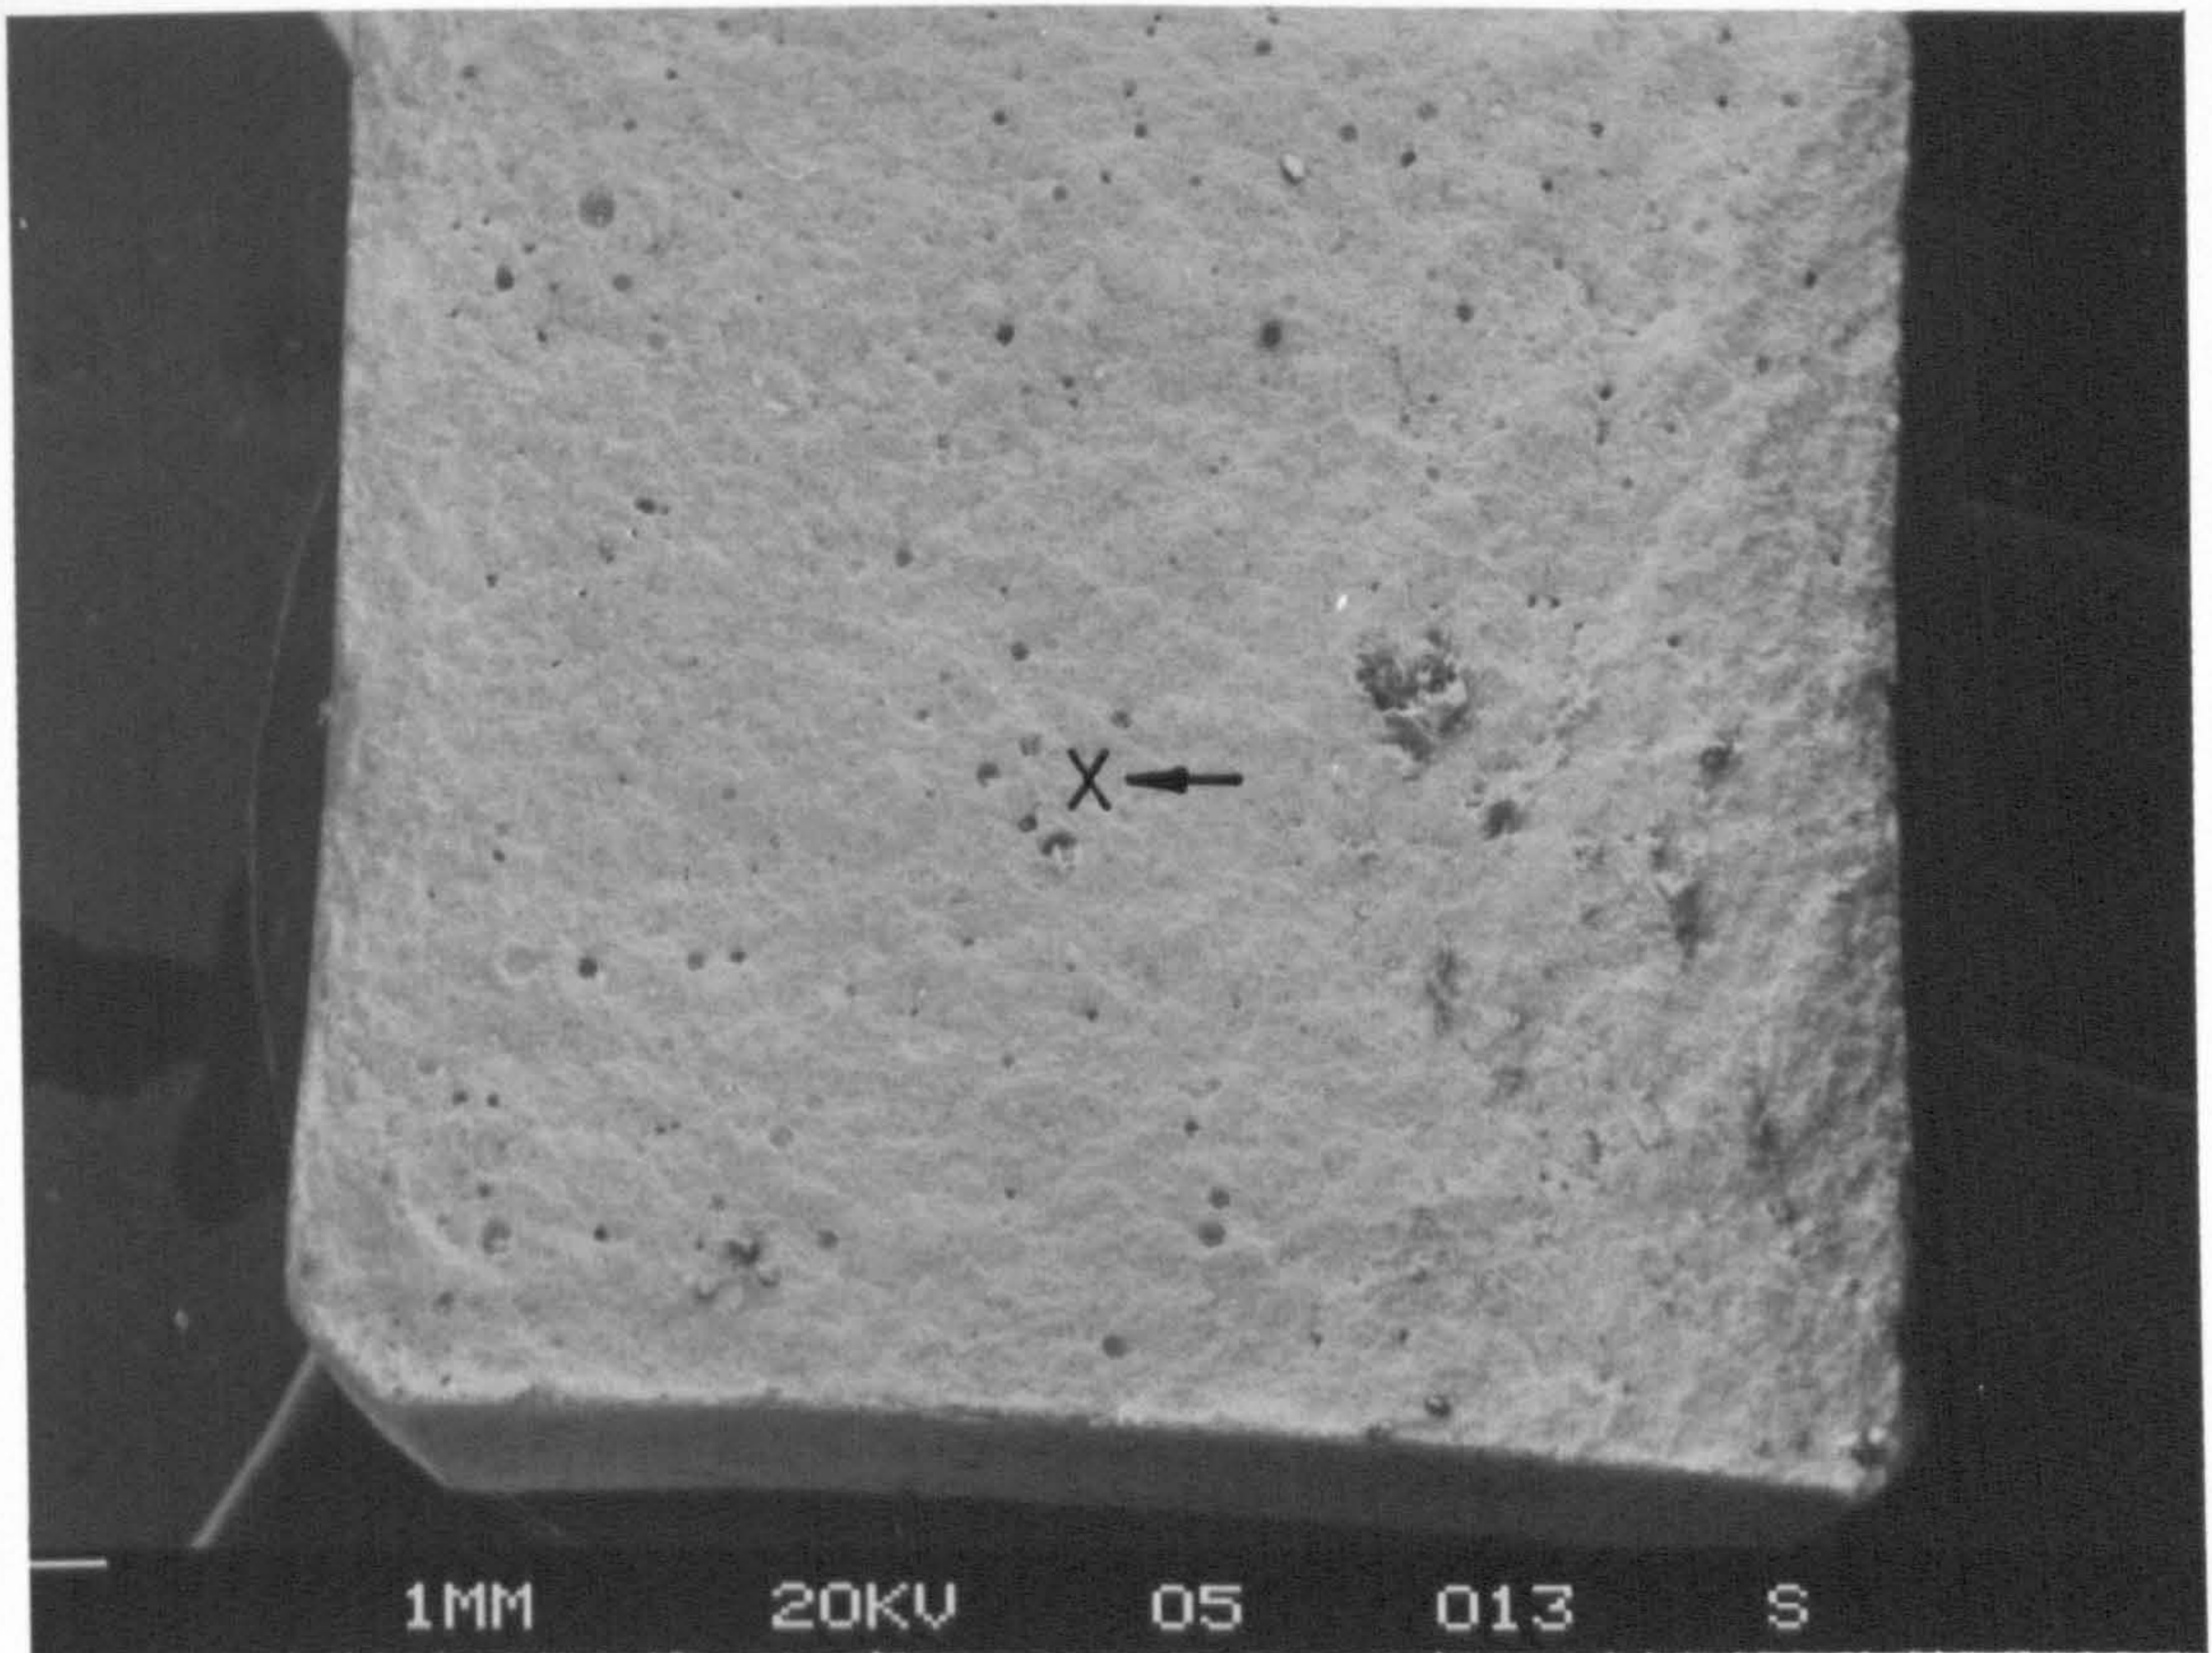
A TYPICAL FRACTURE SURFACE OF A FOUR-POINT BEAM BEND TEST WITH POROSITY; x 6
